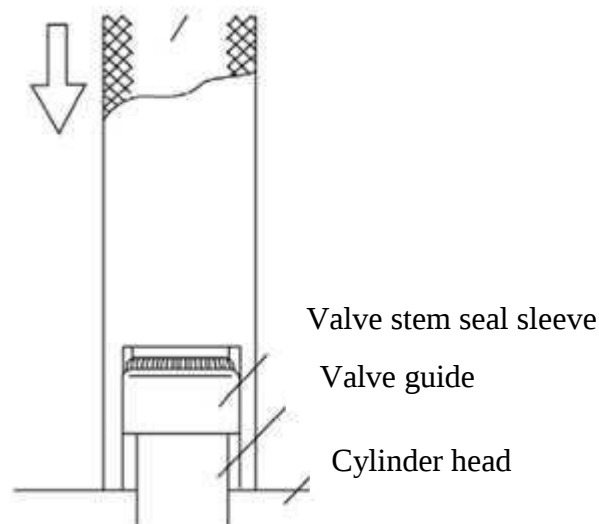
Assembly of Valve Stem Seal Sleeve
